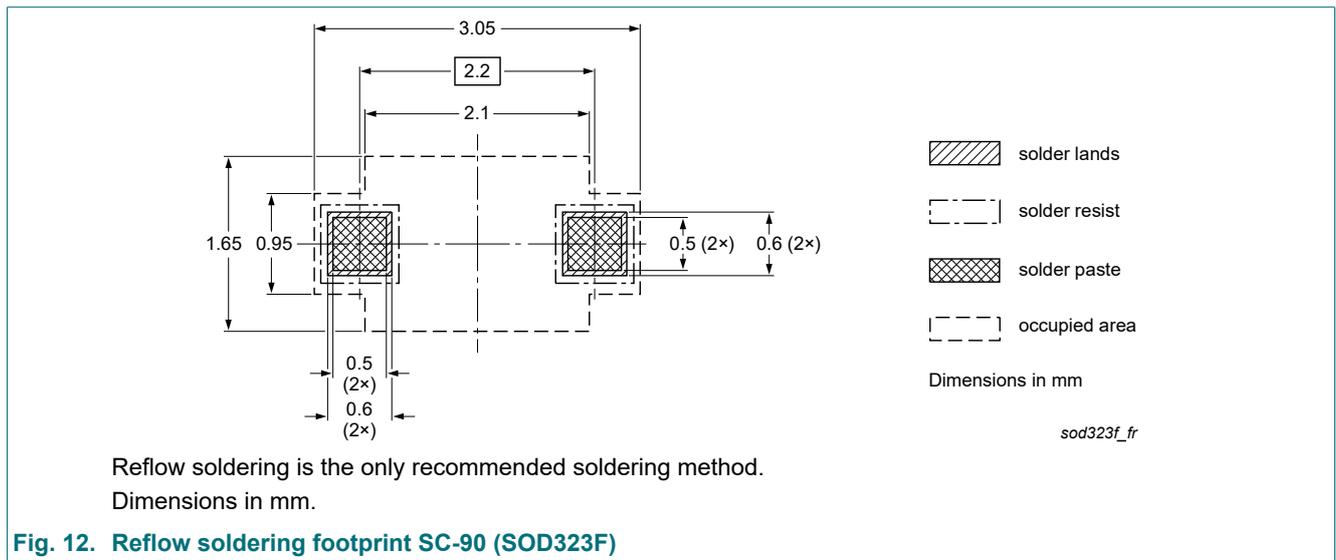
Reflow soldering footprint SC-90 (SOD323F)
